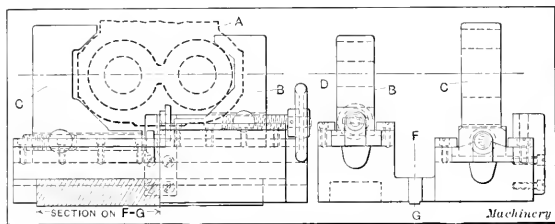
Milling Fixture used for holding the Cylinder Castings in the Machine shown in Fig. 2
